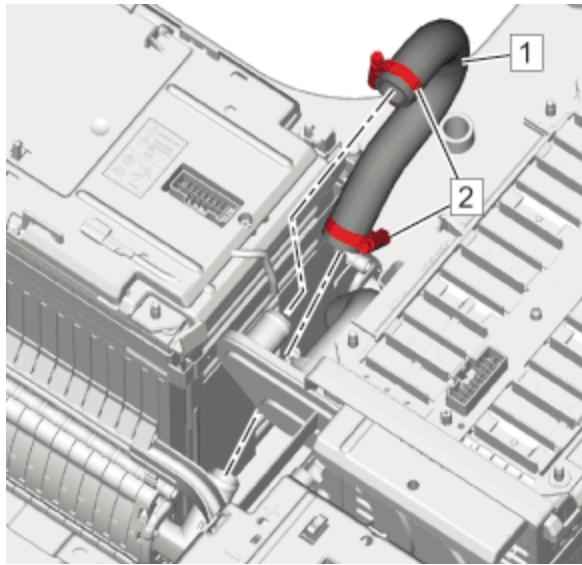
High Voltage Battery Cooling Manifold Outlet Hose Clamp
